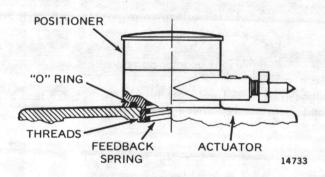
Old-Style MP953A and B Positioner (Gradutrol Relay).
